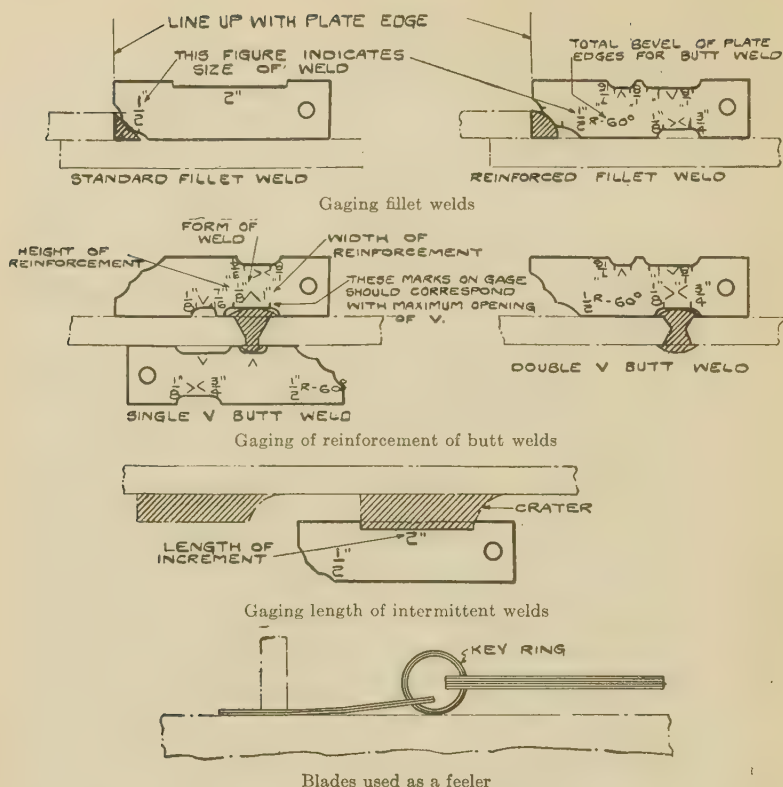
Weld gage for reinforced fillet welds and reinforcement of butt welds.
